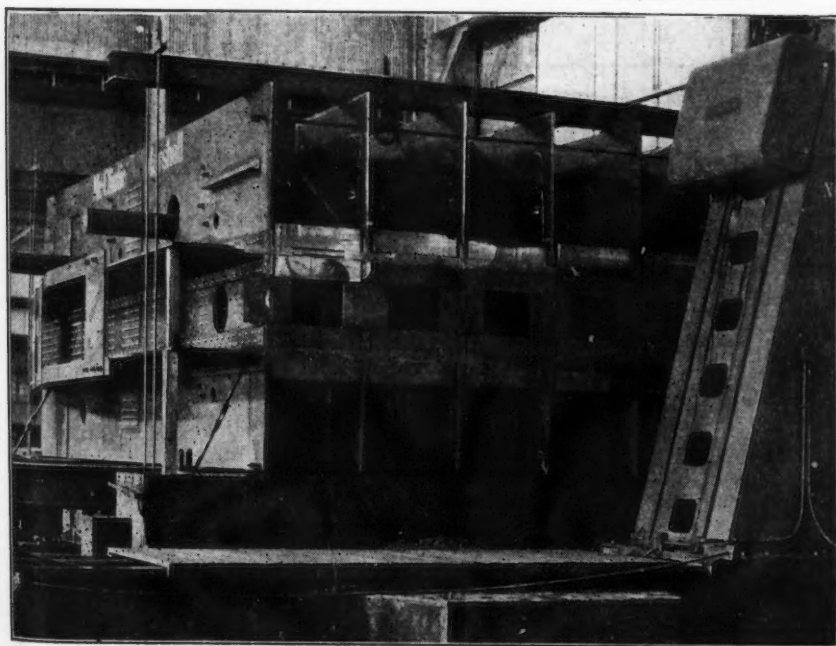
MILLING TOP SECTION OF TOWER COLUMN.
